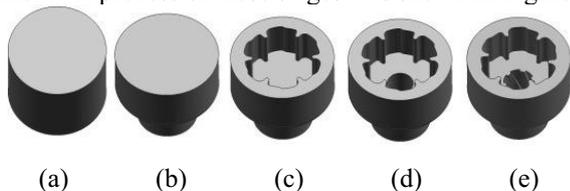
The forming process of automotive guide cylinder: (a) making billet, (b) forward extrusion, and upsetting, (c) backward extrusion cavity, (d)making guiding hole,(e) cold rotary forging internal helical involute spline.
